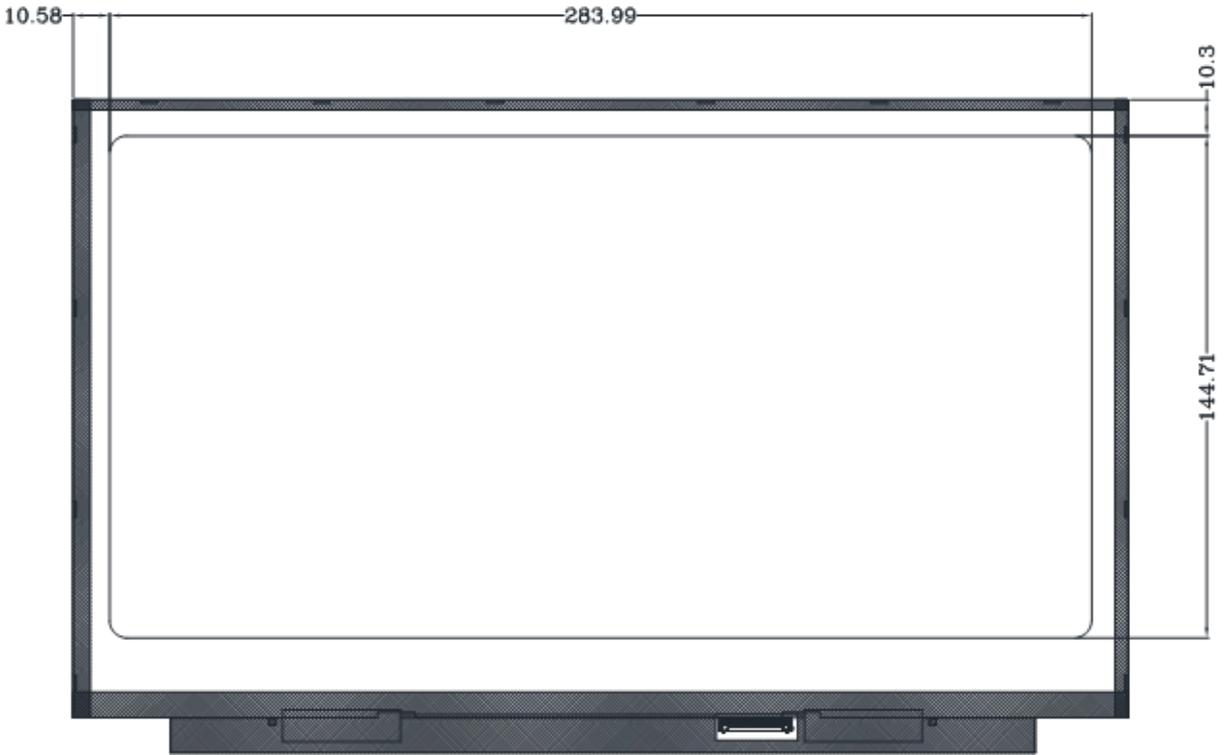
TFT-LCD LCM Outline Dimensions (Rear view)
